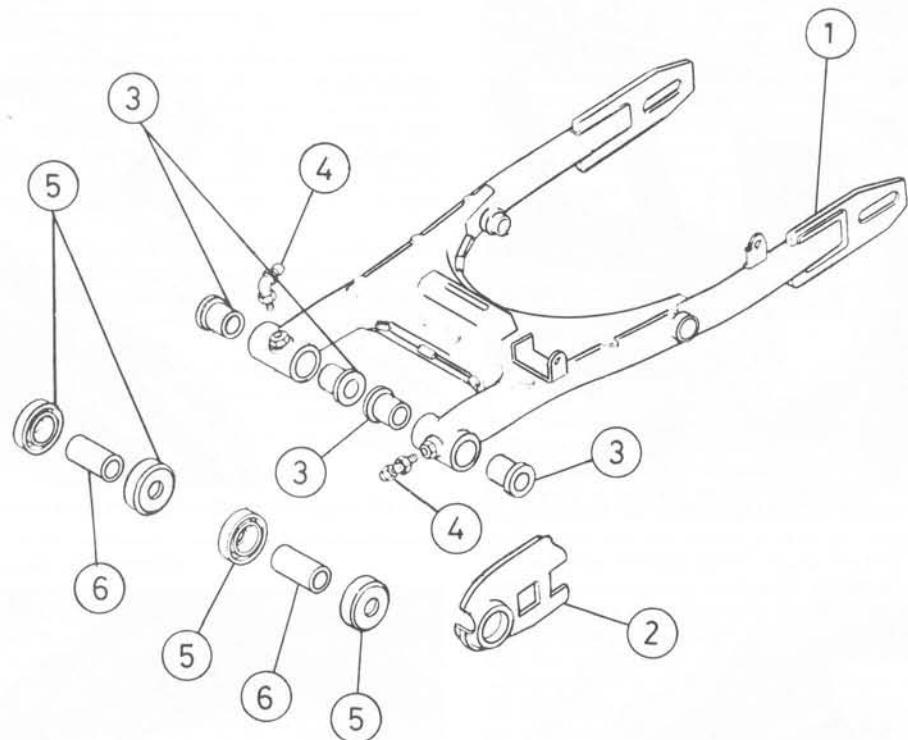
Swinging arm - CB125 T and CM125 C
